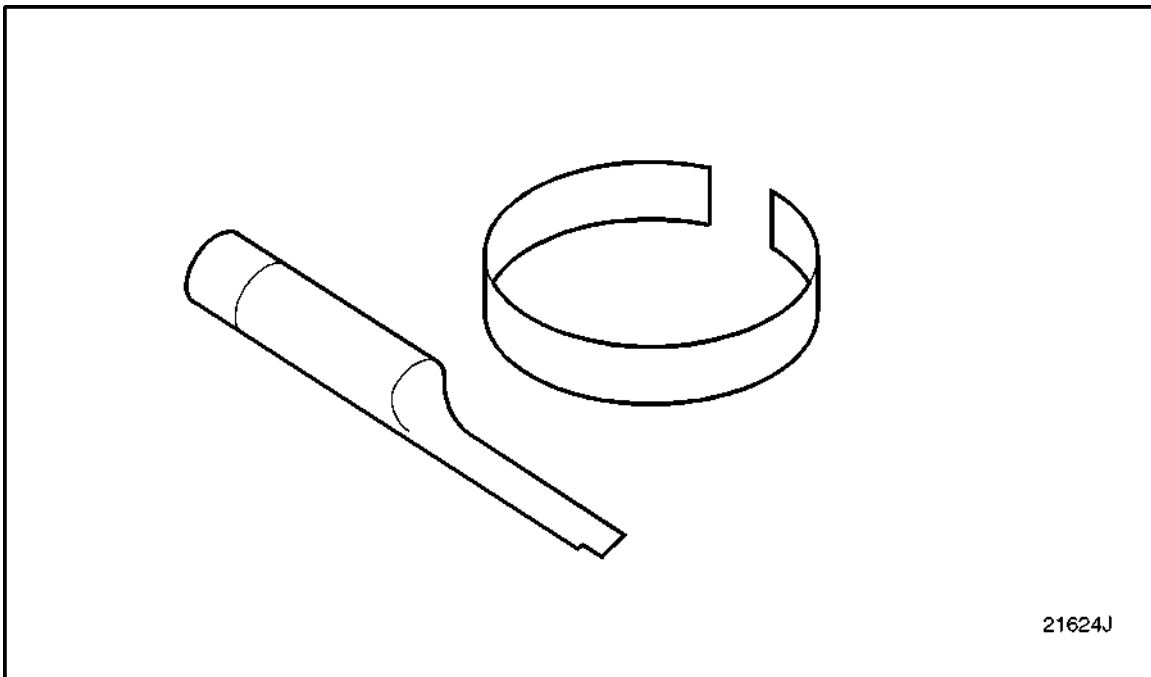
Wear Sleeve Remover,J 37075-A
